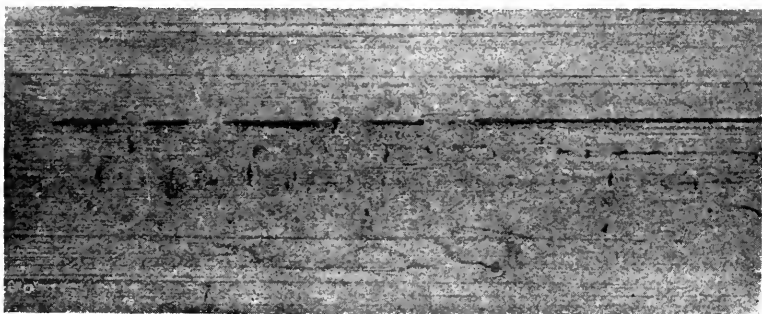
ETCHED HORIZONTAL SECTION AT END OF RAIL 9124-2.
